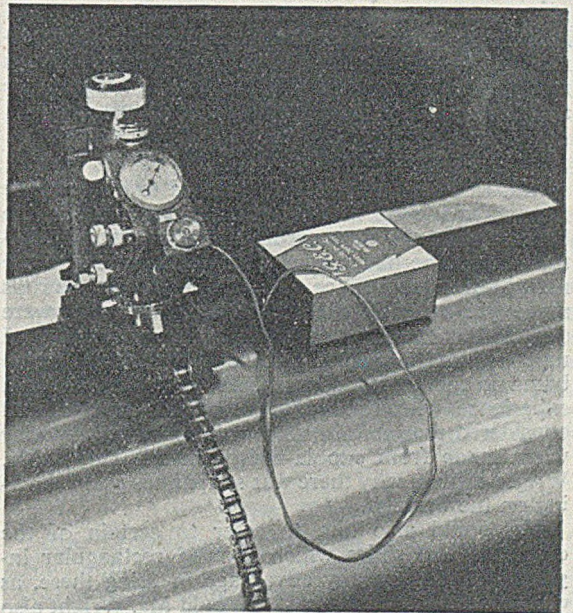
Penetroscope mounted on a 22-in. diam. Chill Roll.
